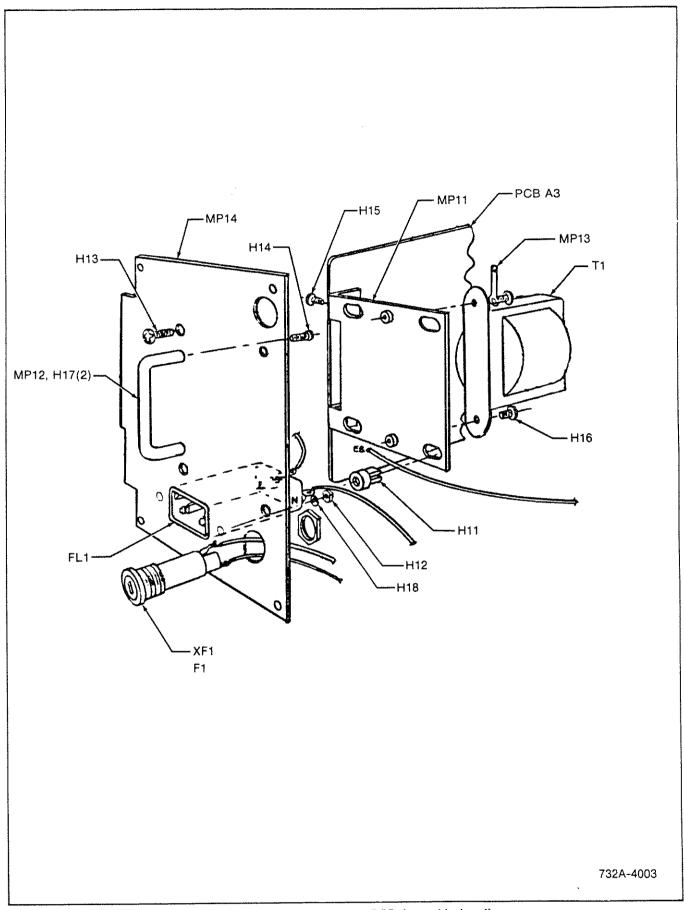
A3 Pre-Regulator PCB Assembly (cont)
